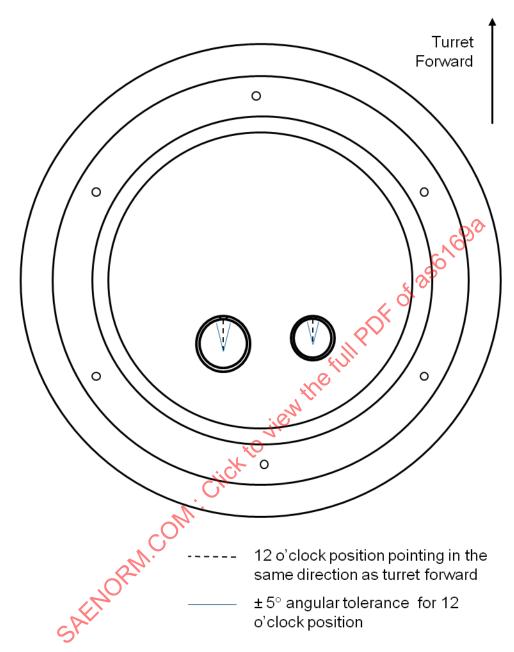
CONFIGURATIONS FOR MAJOR KEYWAYS FOR ELECTRICAL CONNECTORS WITH THE CENTERLINE AXIS PERPENDICULAR TO THE MECHANICAL INTERFACE DATUM
